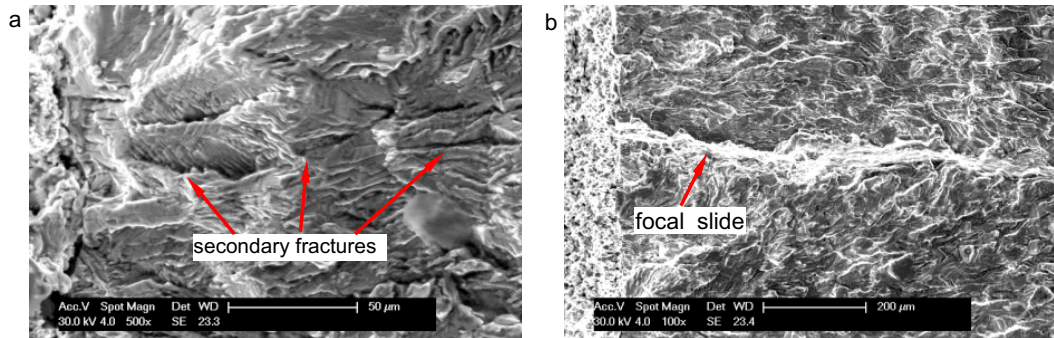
Fatigue fracture of the parent material near the centre of the fracture zone
